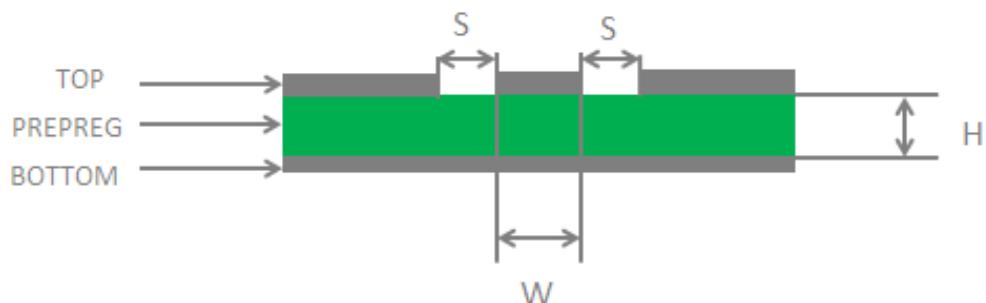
Coplanar Waveguide Design on a 2-layer PCB
